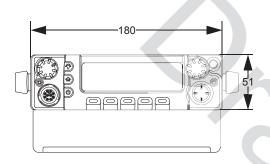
Front View of O5 Control Head with Remote Mount and Trunnion
